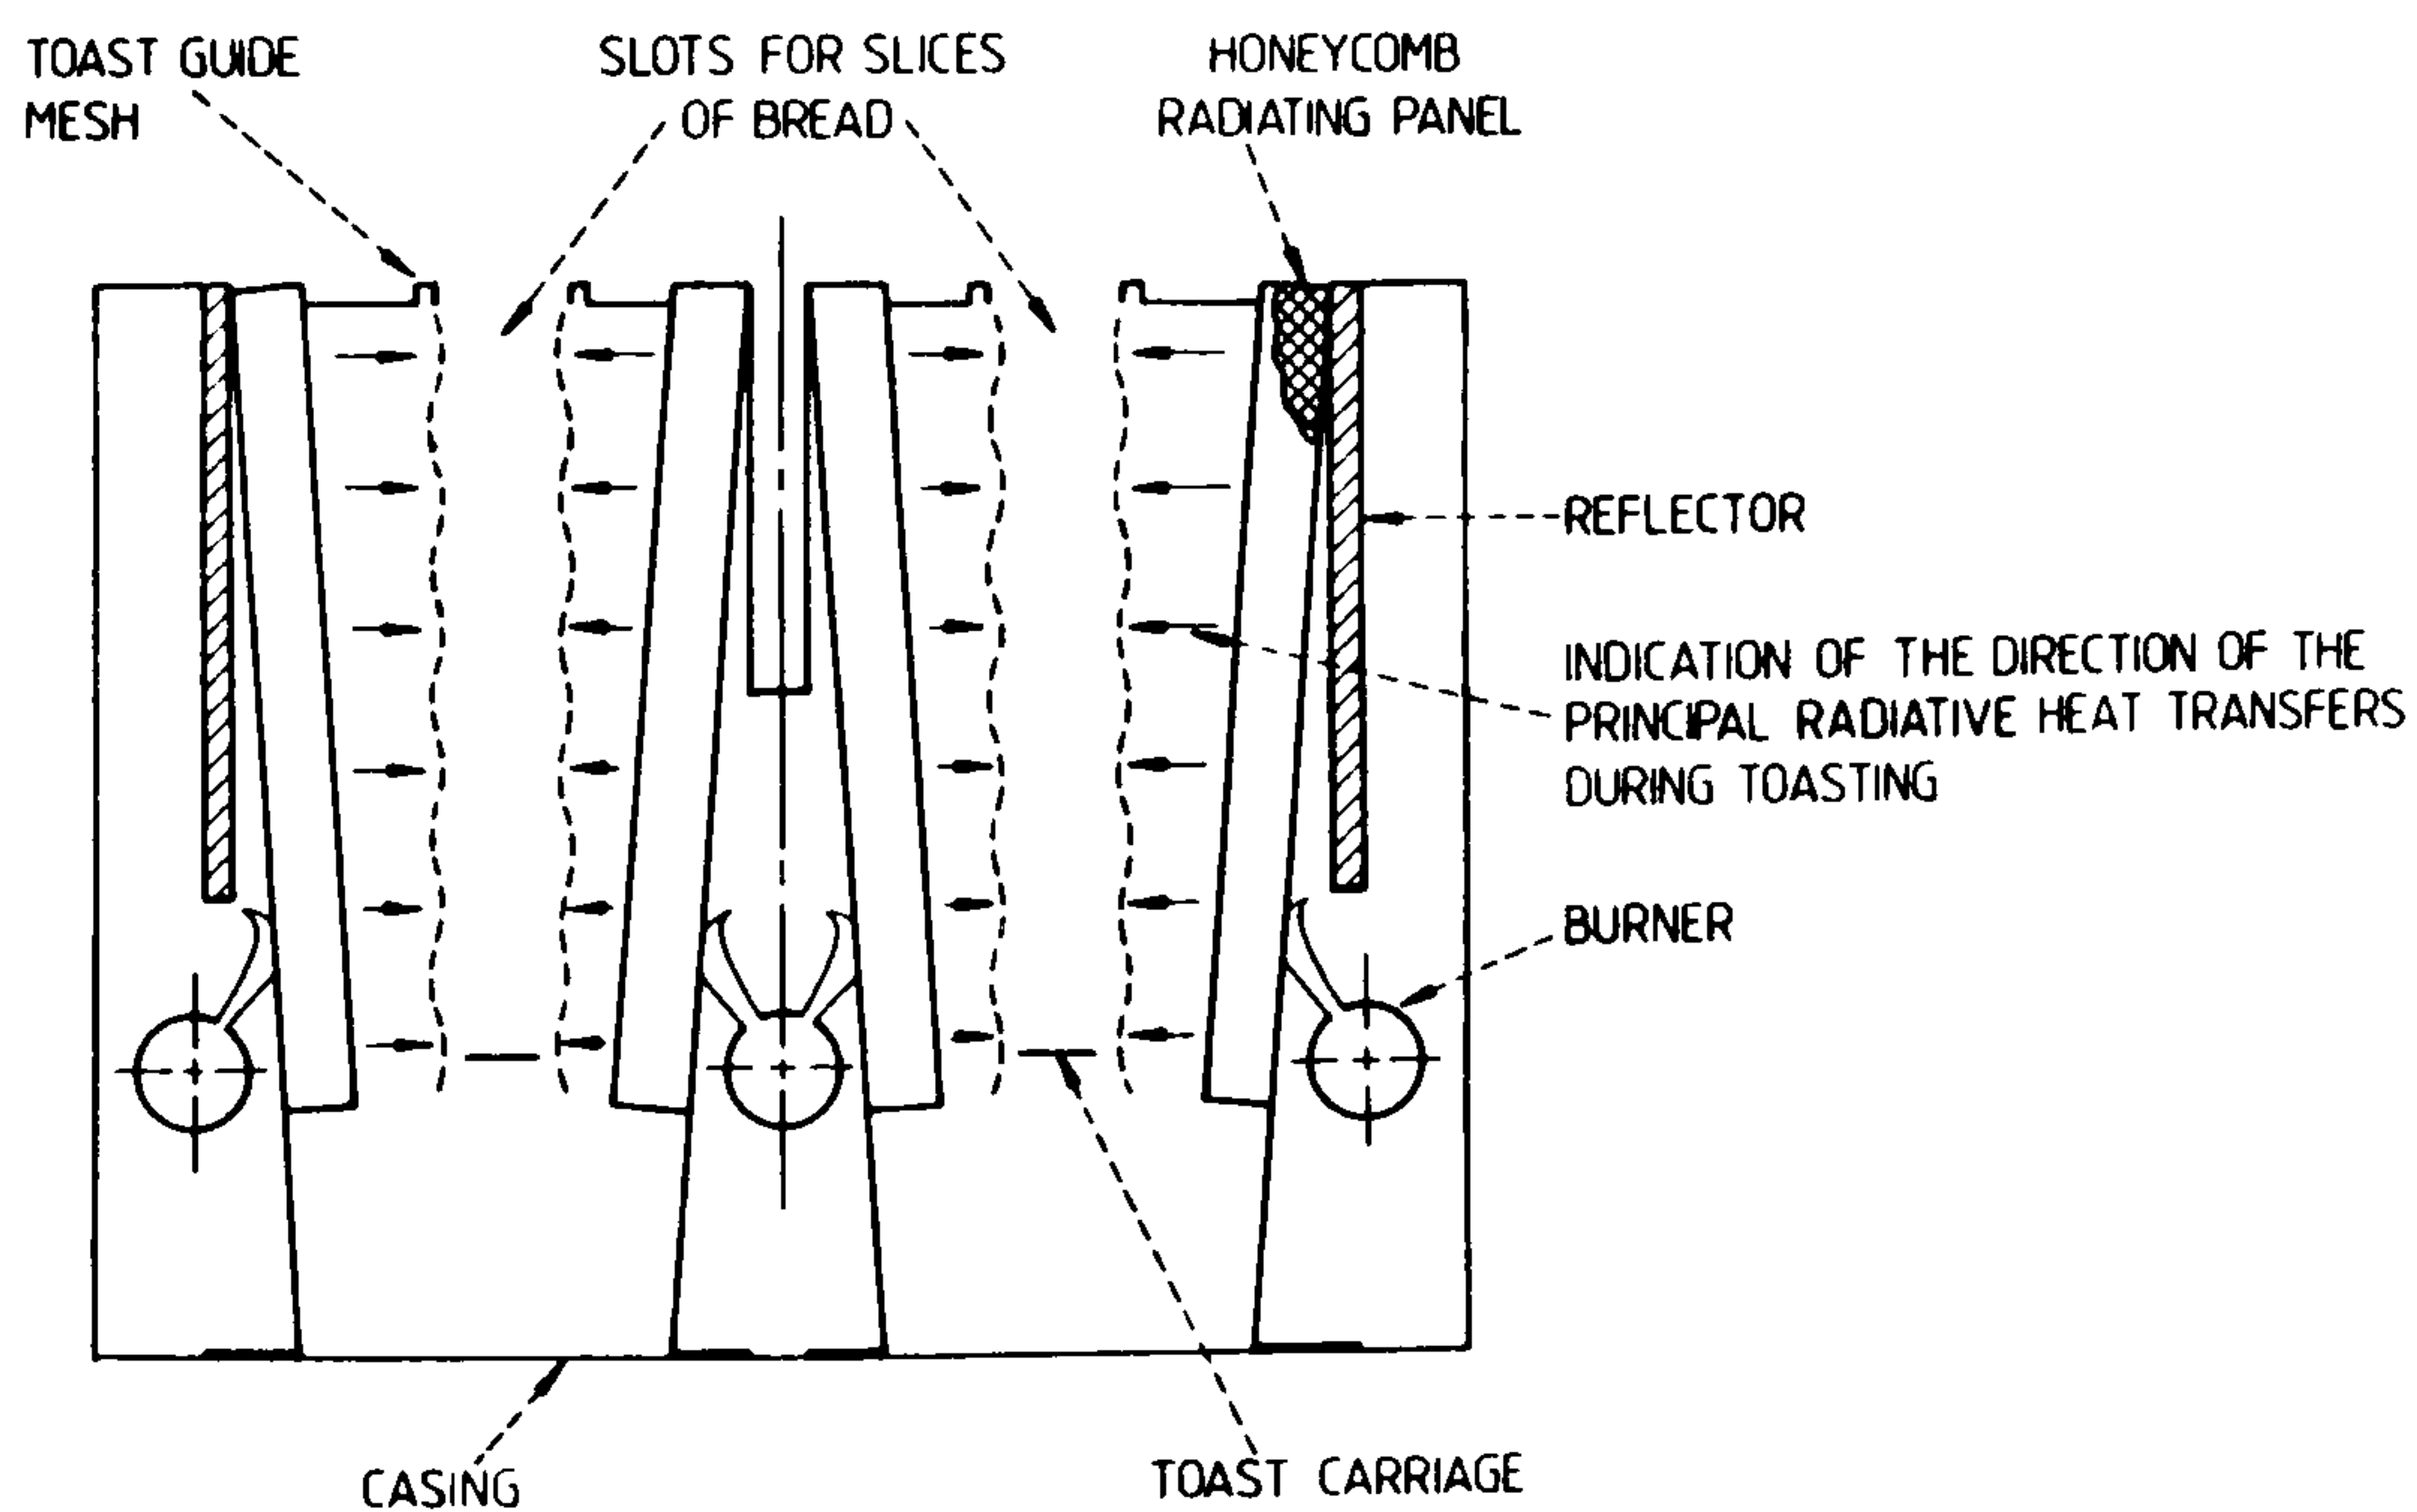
A schematic view of the basic features of a prototype gas-fired 'pop-up' toaster.¹⁹
